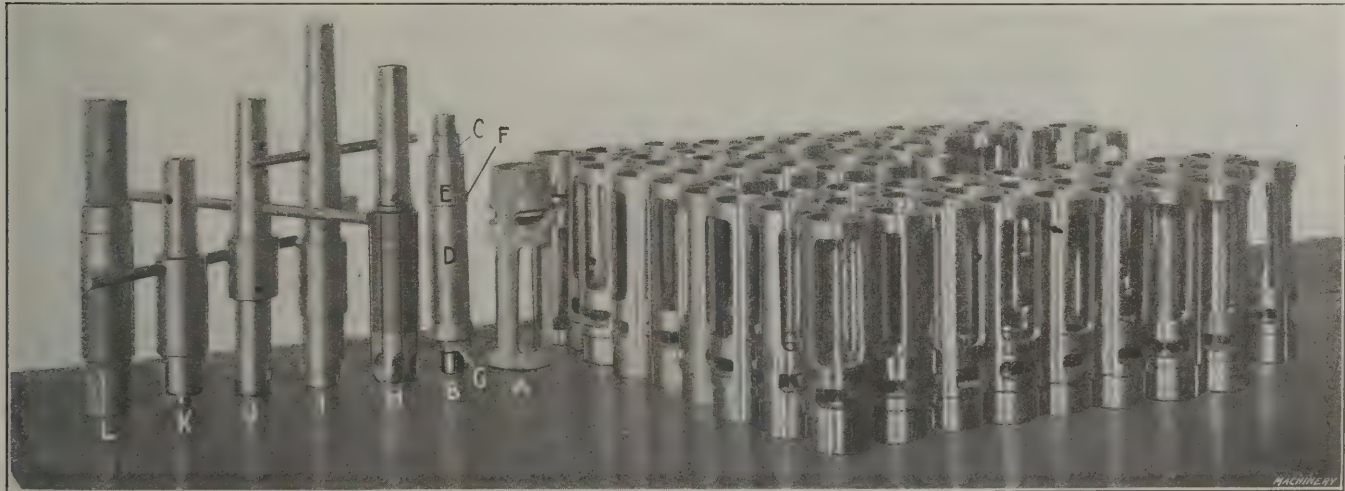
Turbine Valve-seats and Tools for Machining. A Specimen of Apprentices' Work
